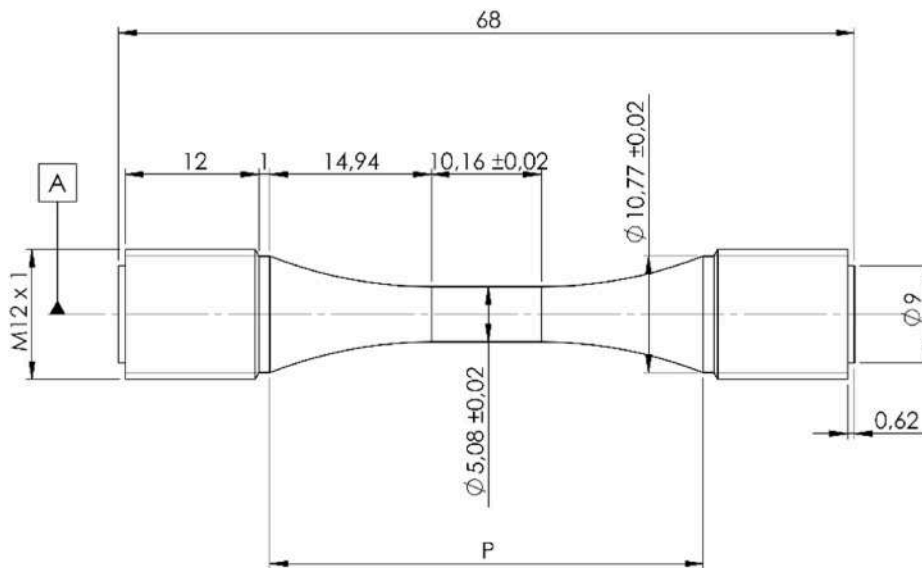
Geometry and dimensions for fatigue test pieces; dimensions are in millimeters [UNI EN 3987:2010].
